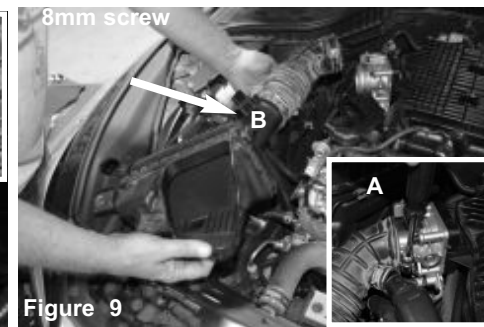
A) For both Driver side and Passenger side, loosen the clamp on throttle body. B) Now lift up and remove the both stock intakes out of the vehicle.
